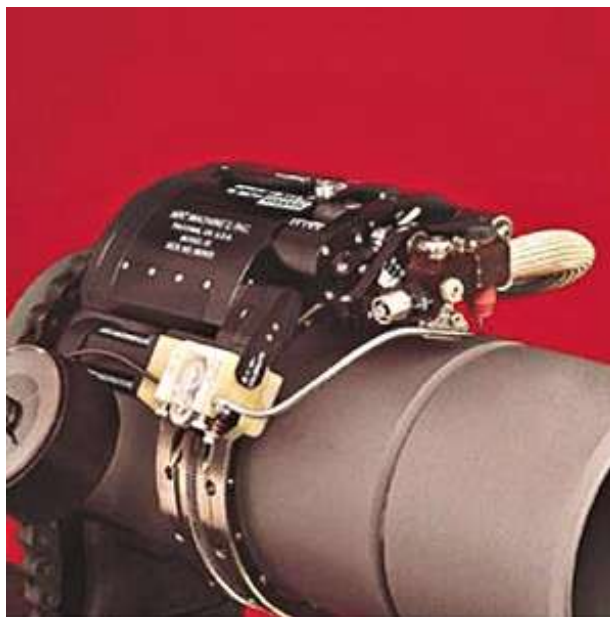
Orbital welding head designed for low clearances.
